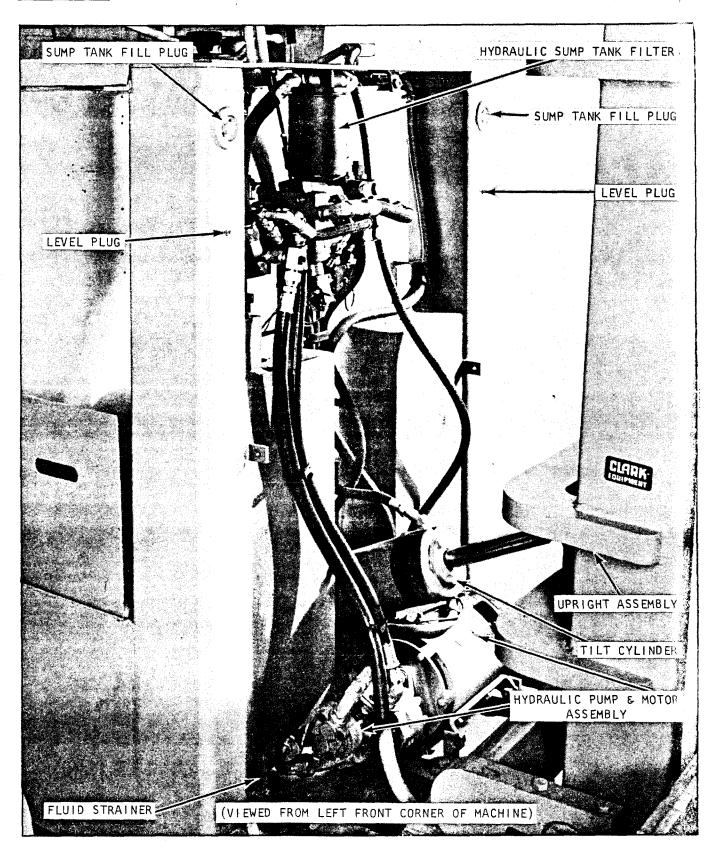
(VIEWED FROM LEFT FRONT CORNER OF MACHINE)
